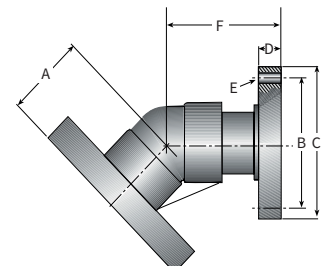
CR⁽³⁾ 45° Reducer, Socket
